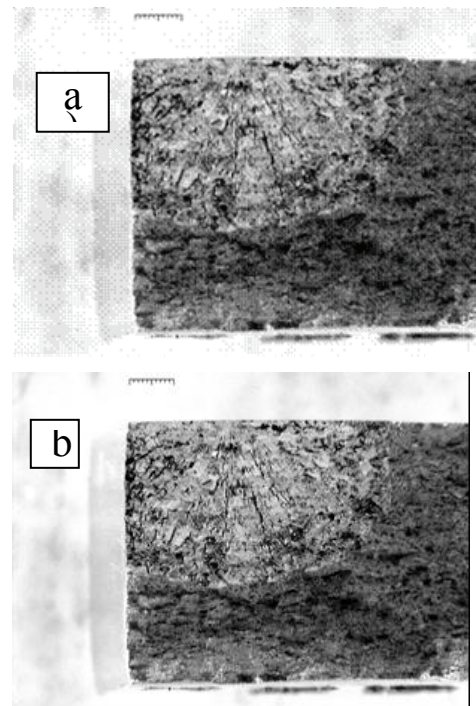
Macrograph of the fracture surfaces of coupons a) KD1R13 and b) KD1P24
